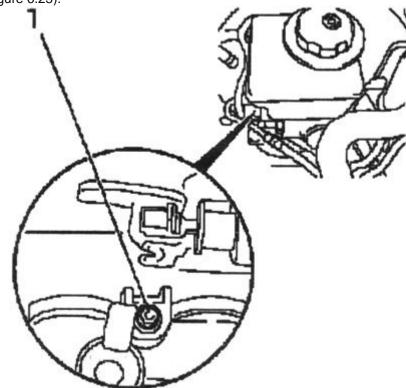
Bolt fixing cistern hydro drive Brake system:
